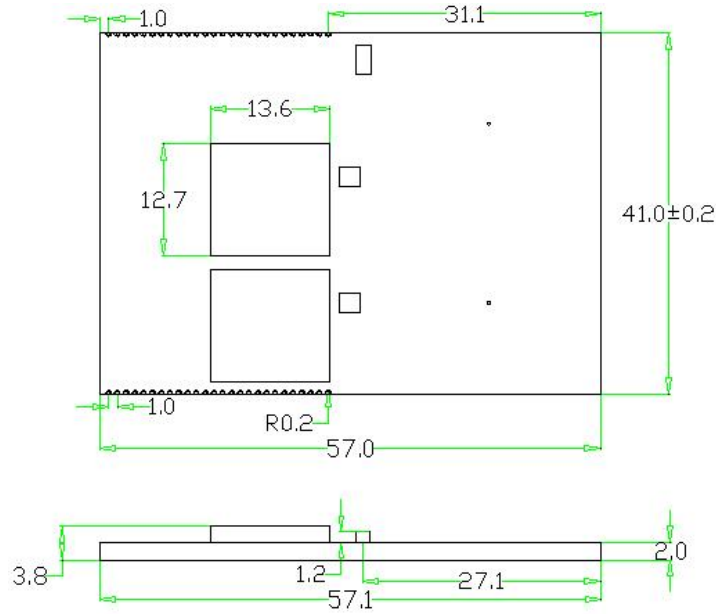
SKU611 PCB Dimensions(units: mm)
